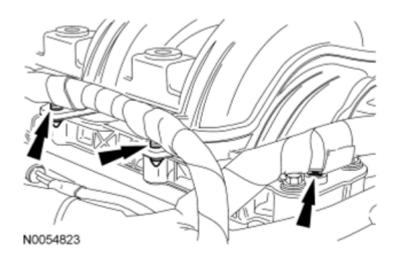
Locating PCV Hose Courtesy of FORD MOTOR CO.
